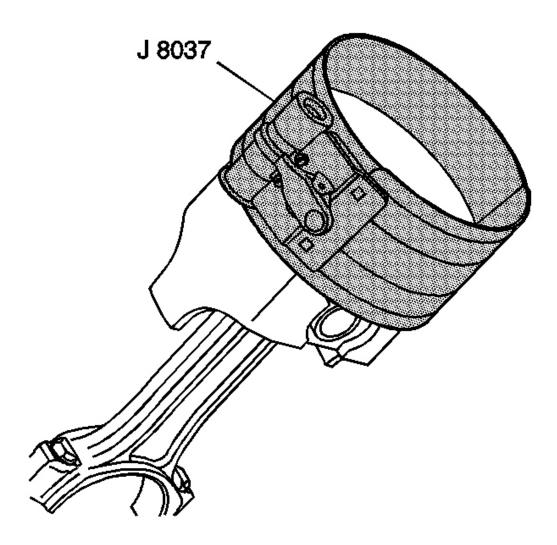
Compressing The Piston Rings Using J 8037 Courtesy of GENERAL MOTORS CORP.
